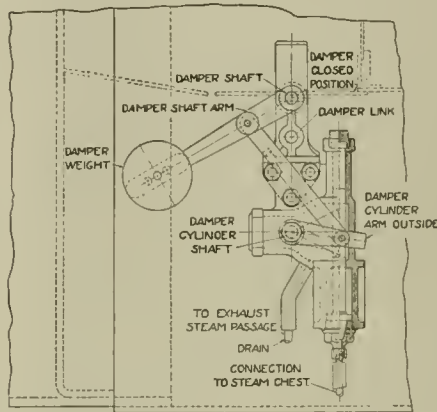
DAMPER CLOSED, DETAILS OF RIGGING AND METHOD OF PIPE LAGGING.
